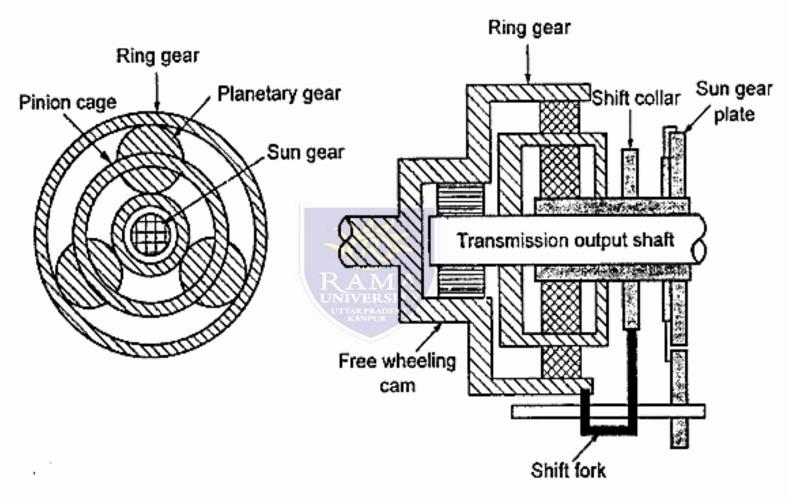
Planetary gear set arrangement of overdrive mechanism
